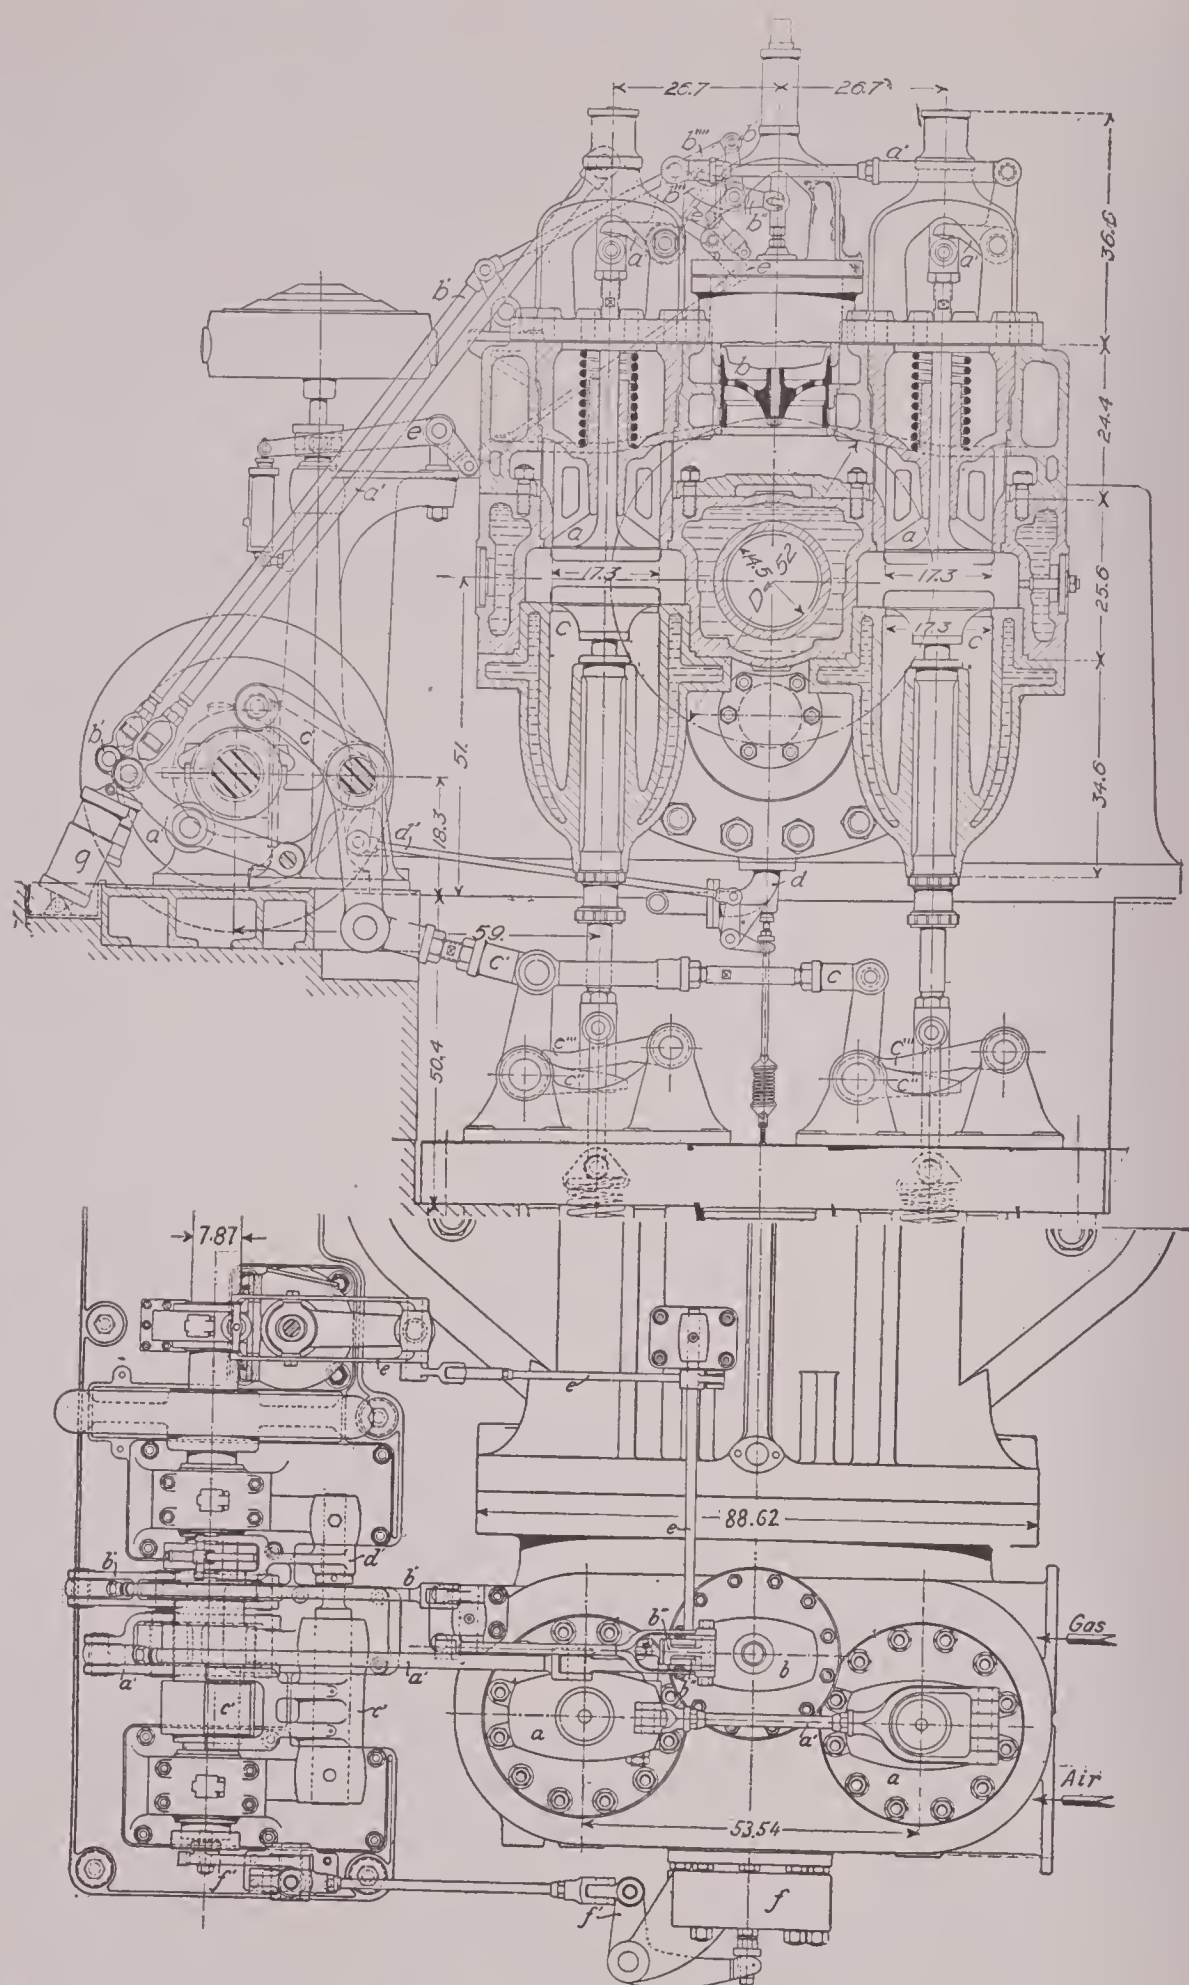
and 271.—Valve Gear, Motorenfabrik Werdau.
